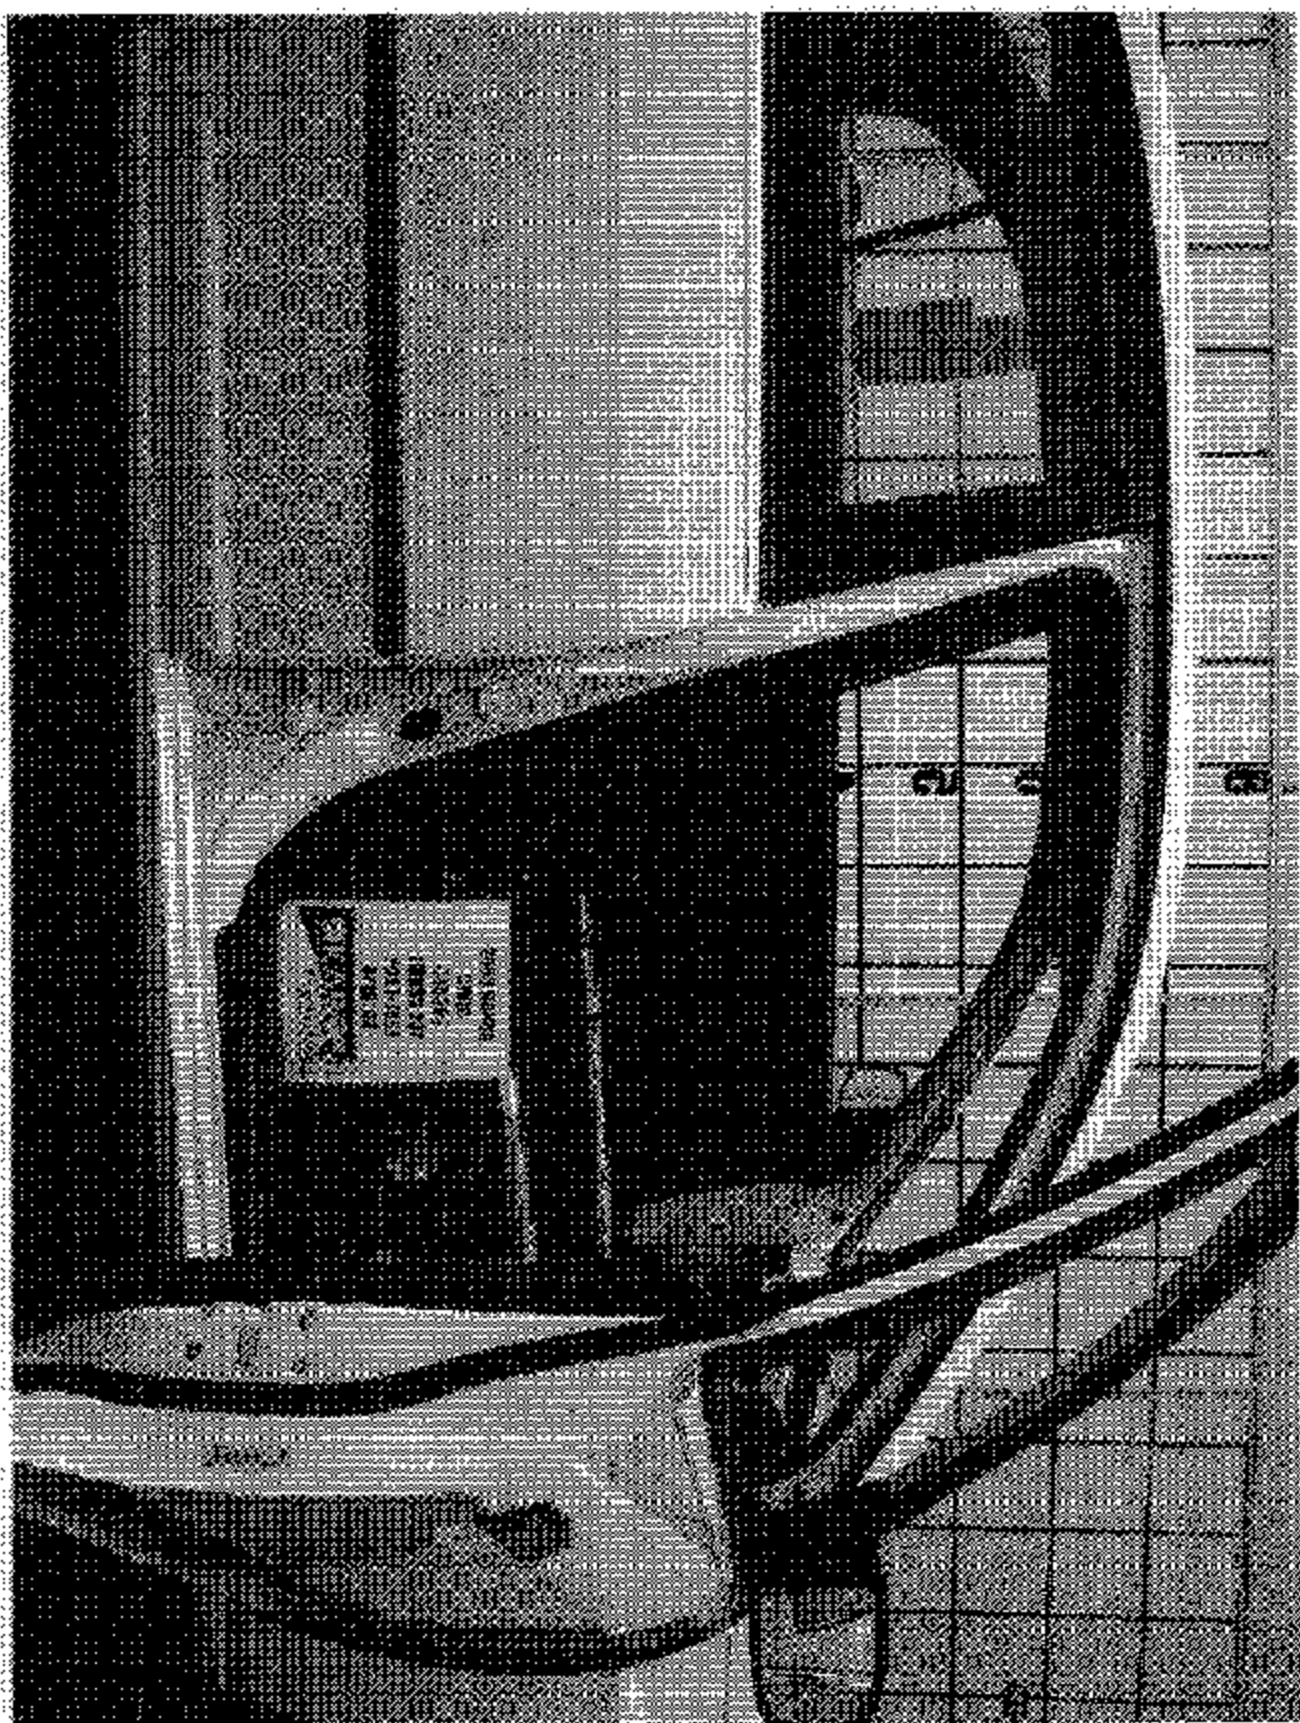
All Load on Seat Frame and Adjusters, Passenger's Side, Post-Test
